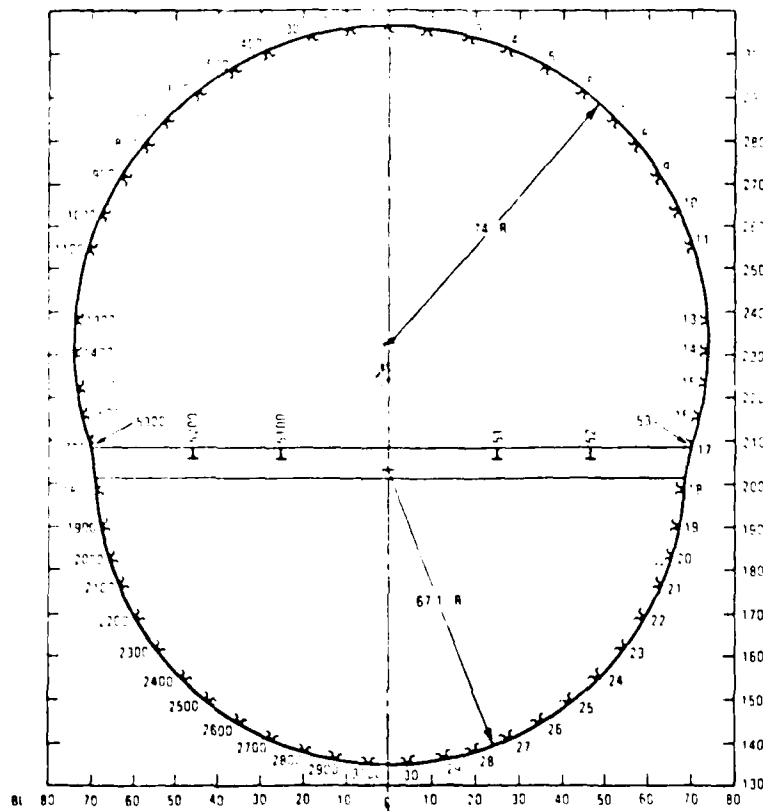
TYPICAL CROSS SECTION WITH STIFFENER LOCATIONS - REAR VIEW
